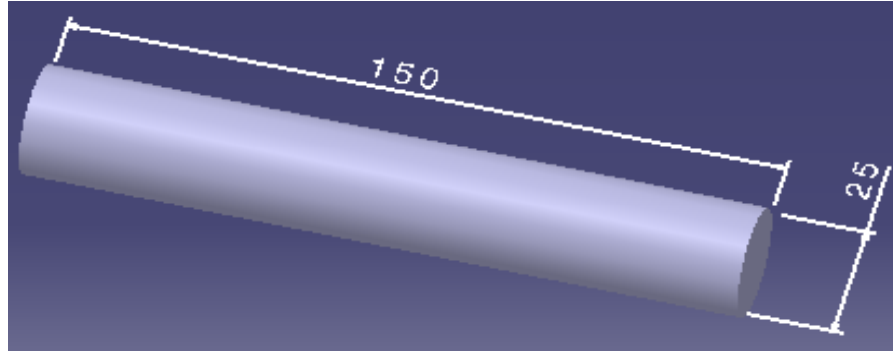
3D Catia drawing of cylindrical specimen.
